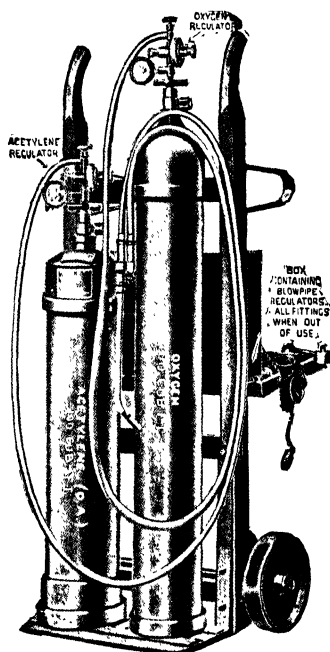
A Portable High-pressure Welding Outfit
